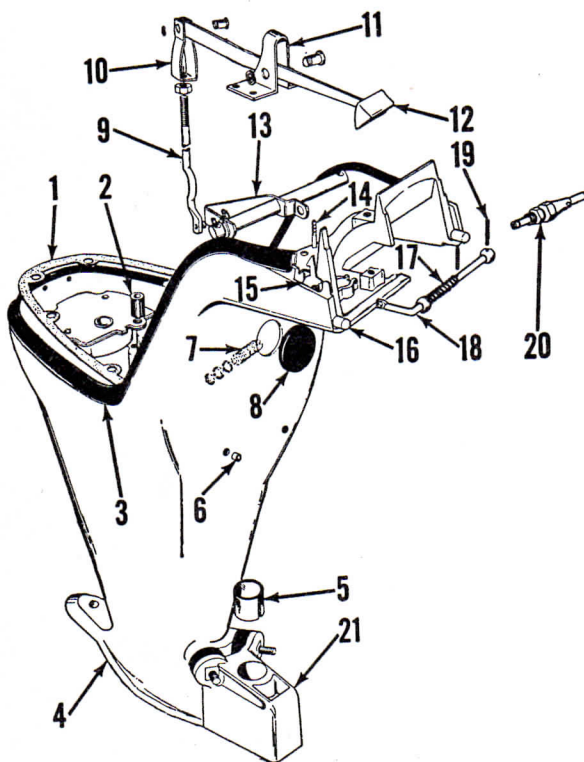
Exploded view of lower motor housing used on Fishing Scott and McCulloch 7.5 with weedless drive. Standard drive models are similar except for shift mechanism.
